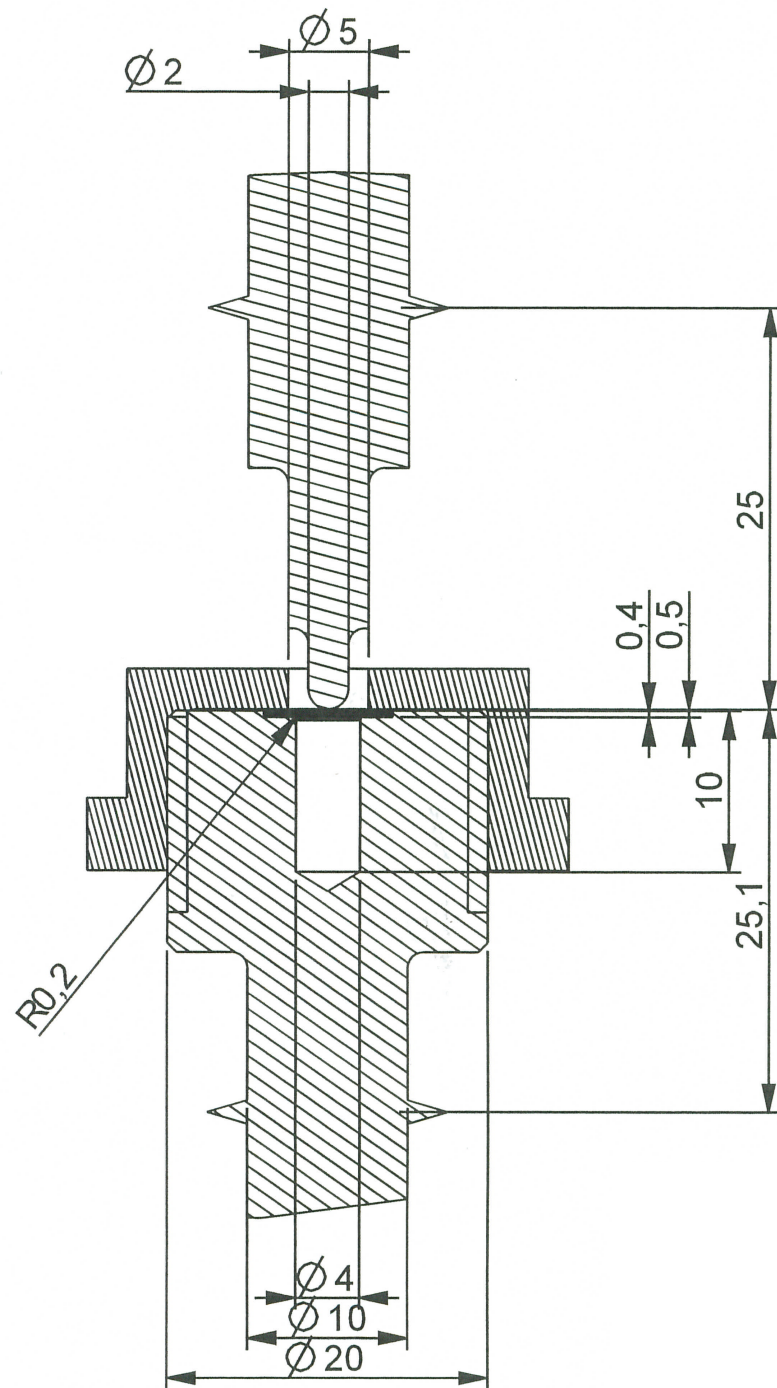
Detailed drawing of E.ON SPC test rig
